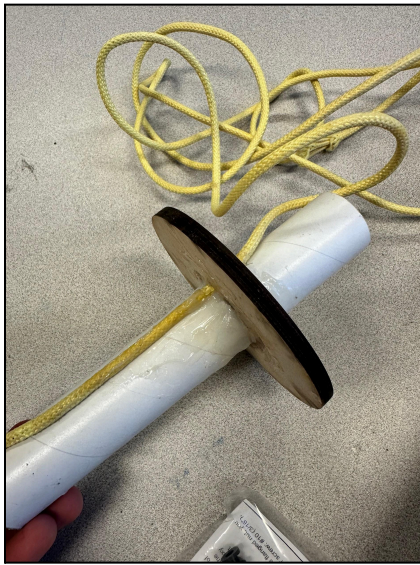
The top centering ring epoxied onto the inner motor mount with the shock cord
